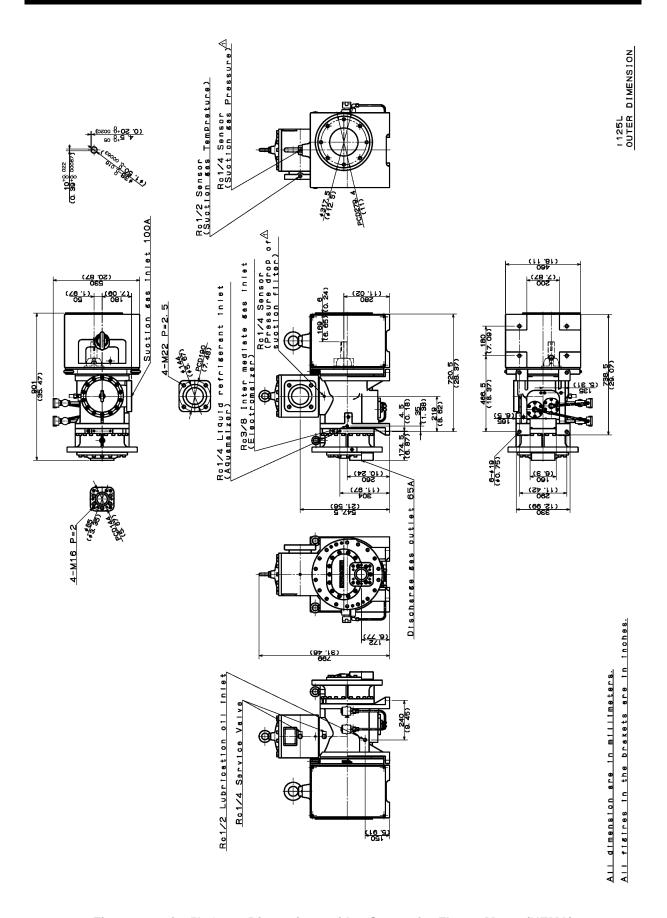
i125L Outer Dimensions with a Spacer for Flange Motor (NEMA)
